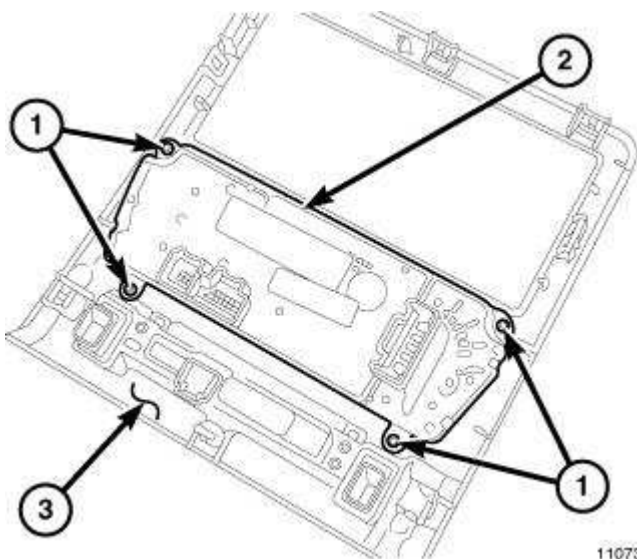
Removing/Installing A/C-Heater Control At Rear Side Panel Center Bezel
